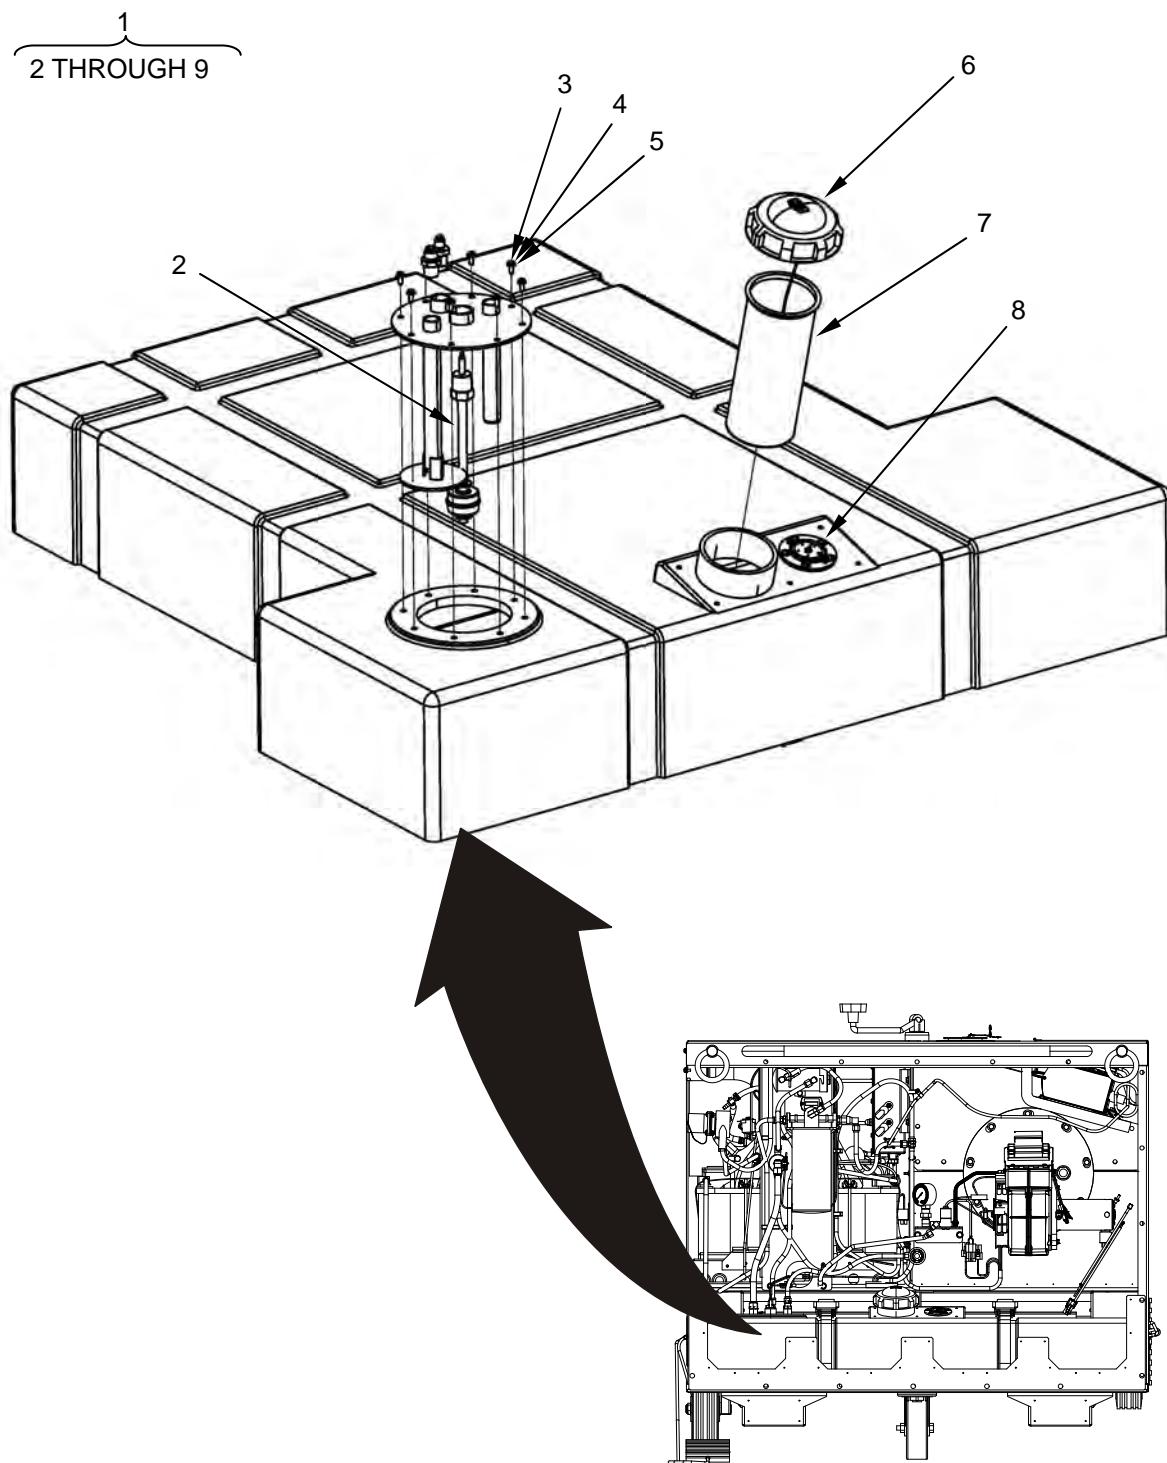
Fuel Tank Assembly (Sheet 1 of 5).
